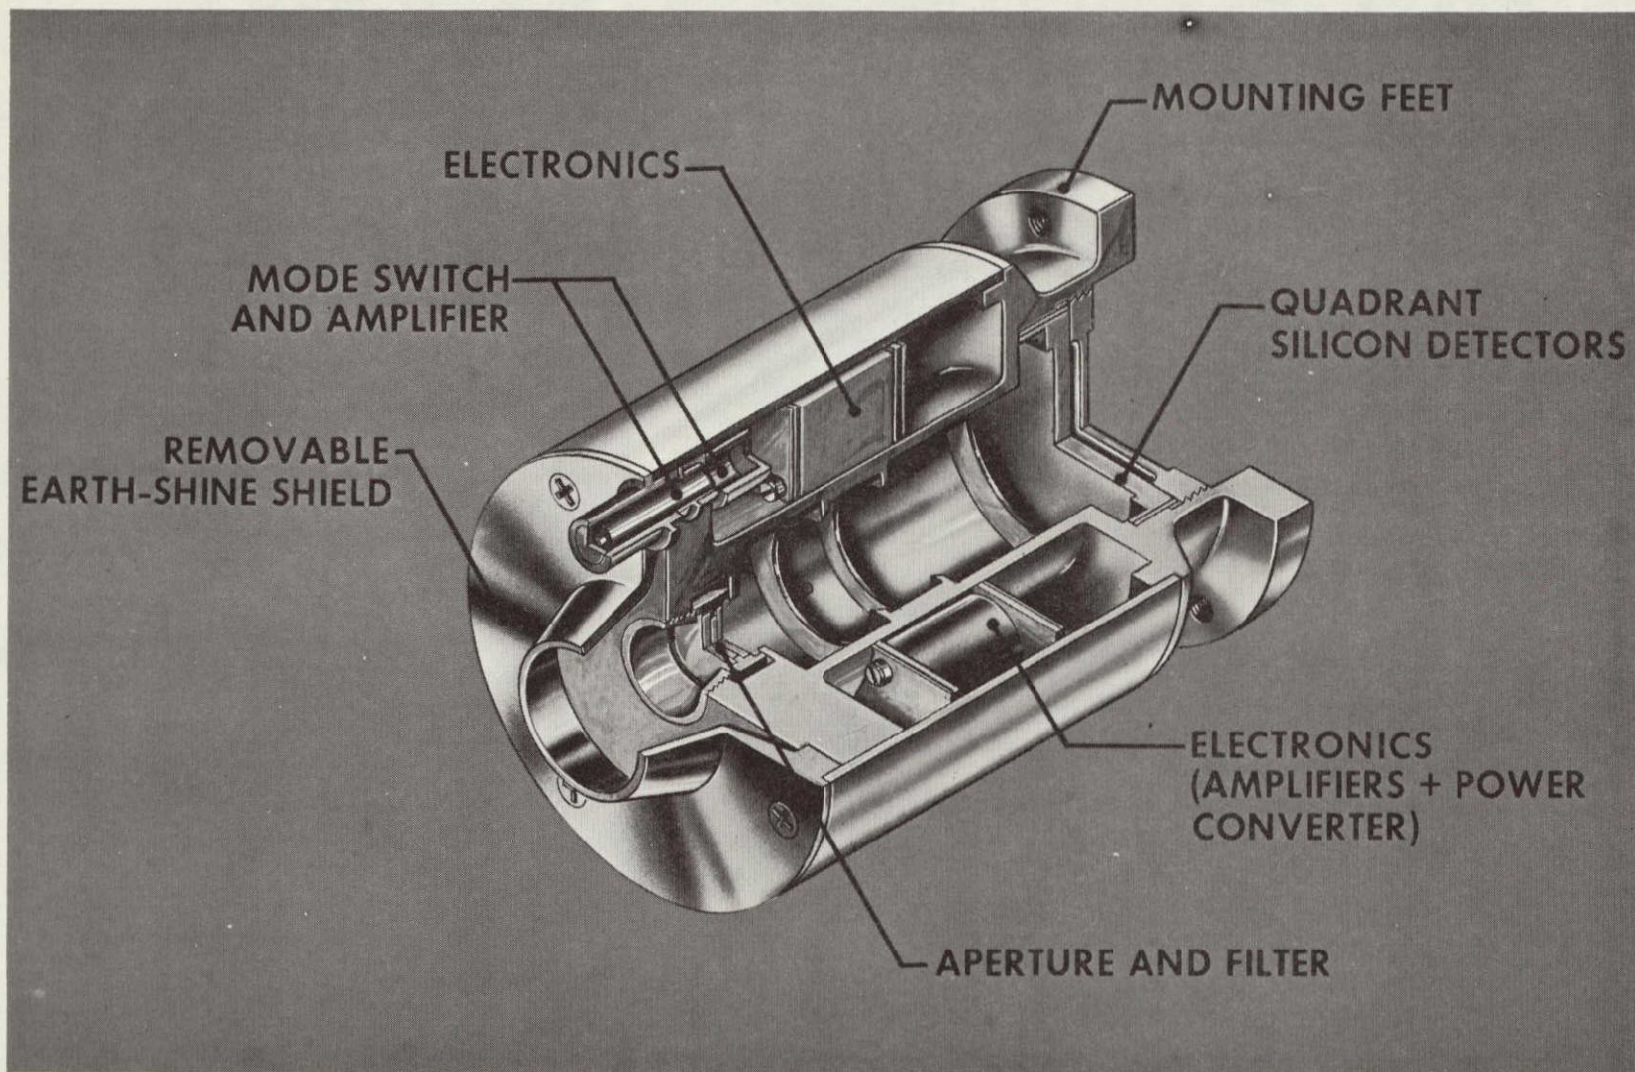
Fine Sun Sensor (FSS) Assembly
